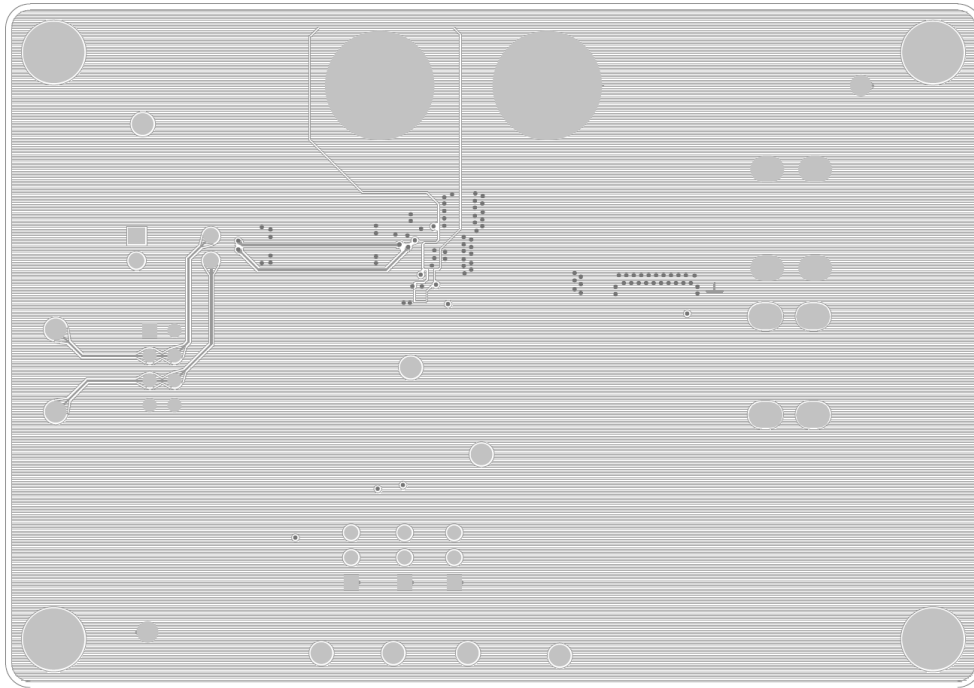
PCB Layout—Inner Side (3<sup>rd</sup> Layer)
